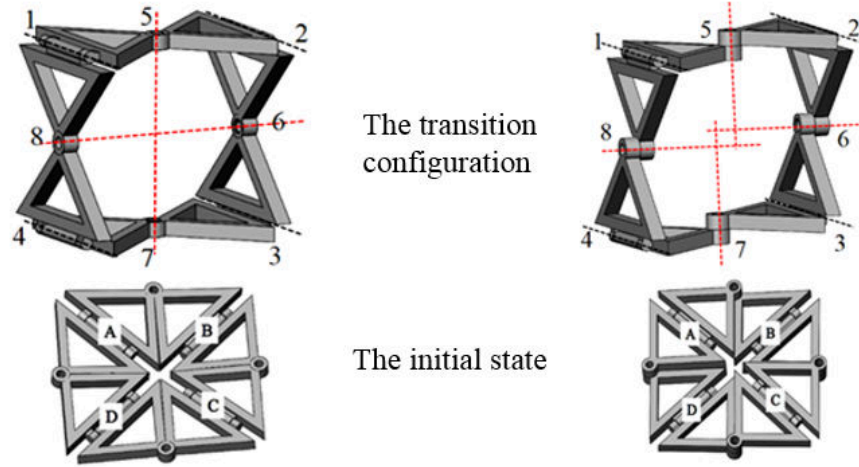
Perpendicular-axis 8R mechanism: (a) the mechanism in [80]; (b) the variation of the mechanism
